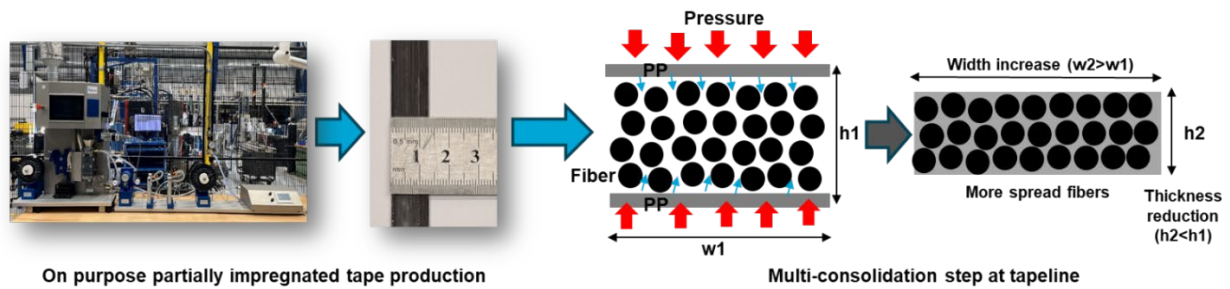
Semi-Industrial UD thermoplastic tape manufacturing line and calendaring stage of partially impregnated tapes.
